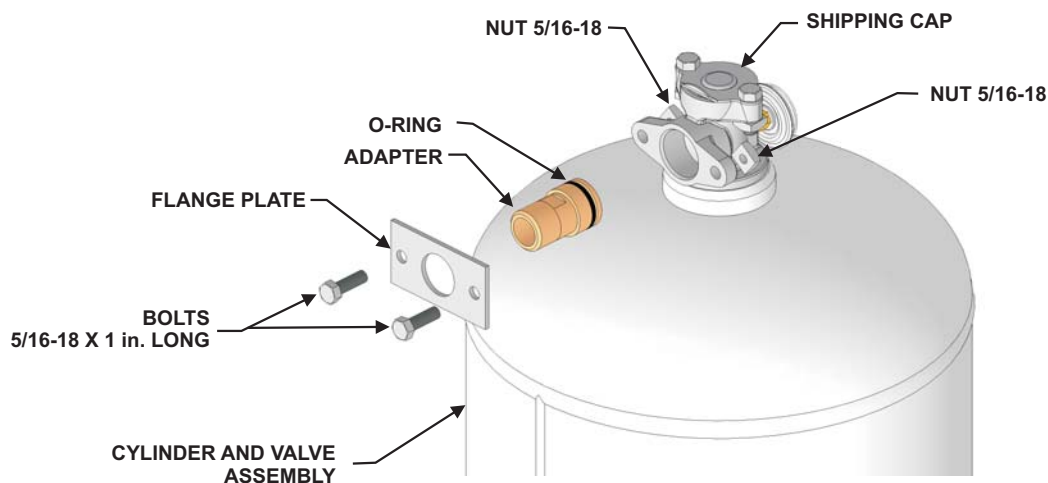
Installing the Discharge Adapter Kit, P/N 844908
